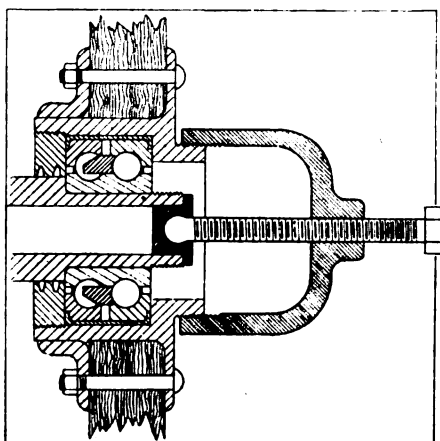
When removing wheels containing ball bearings a puller should always be used if the wheel shows any tendency to stick
